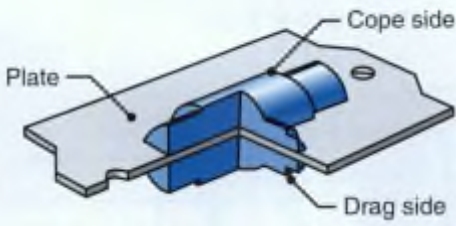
A typical metal match-plate pattern used in sand casting.
